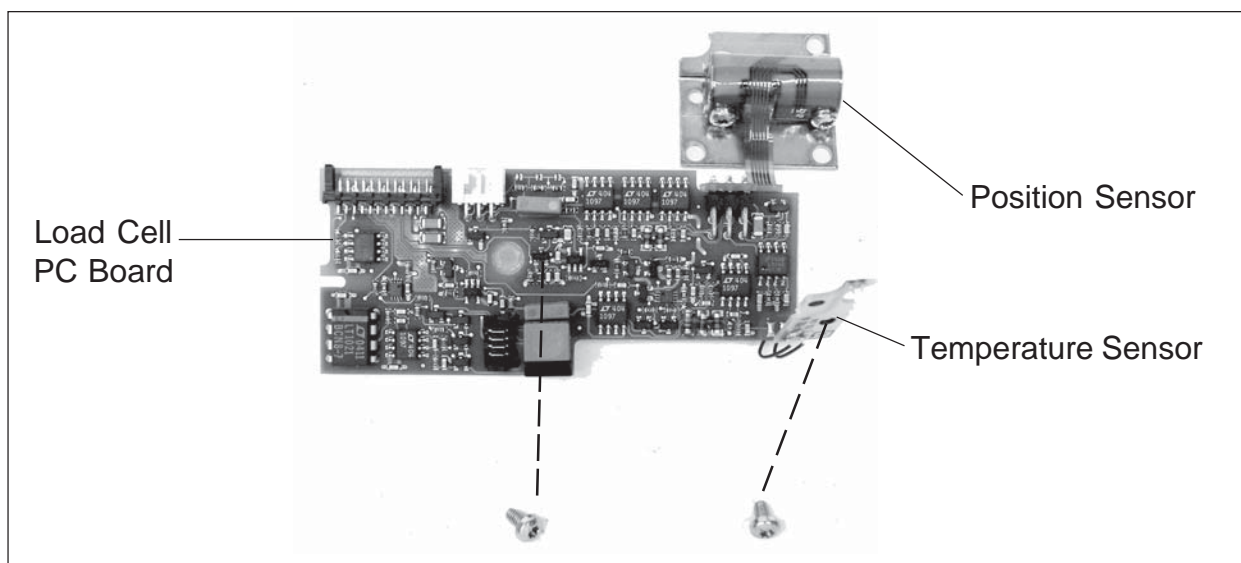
Load Cell PC Board Removed from Load Cell.
